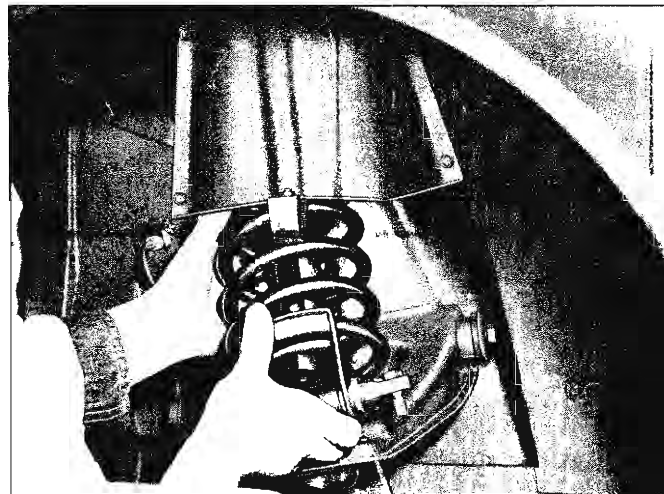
Removing Spring and Seat Assembly—Chevy II
